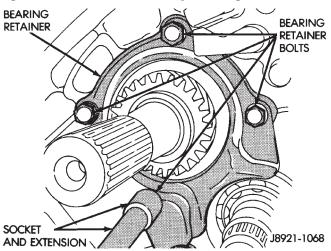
Remove Output Shaft Rear Bearing Retainer
